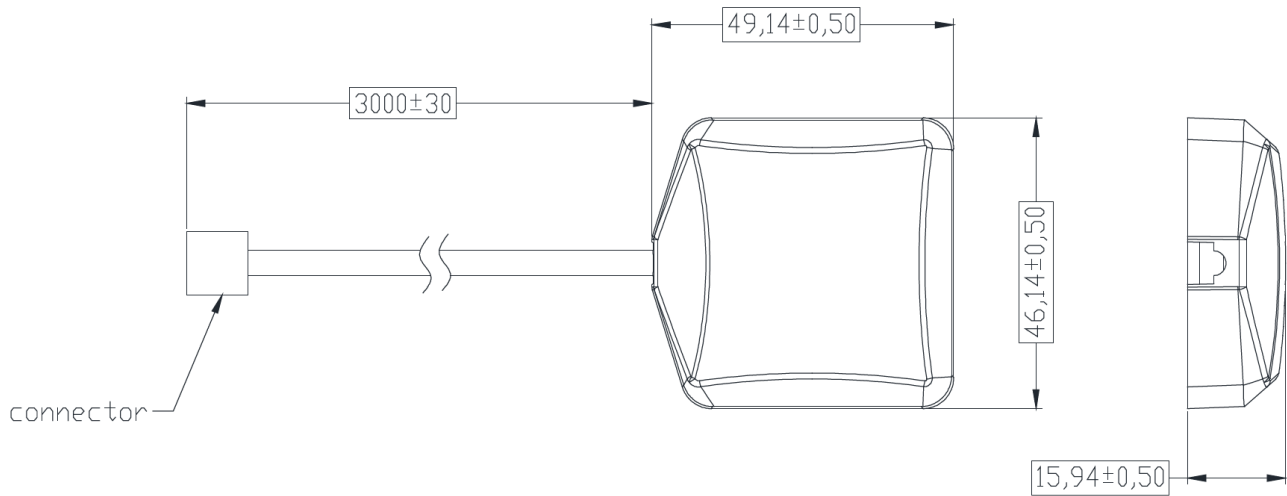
ANN-MB5 mechanical drawing. Dimensions are given in mm.
